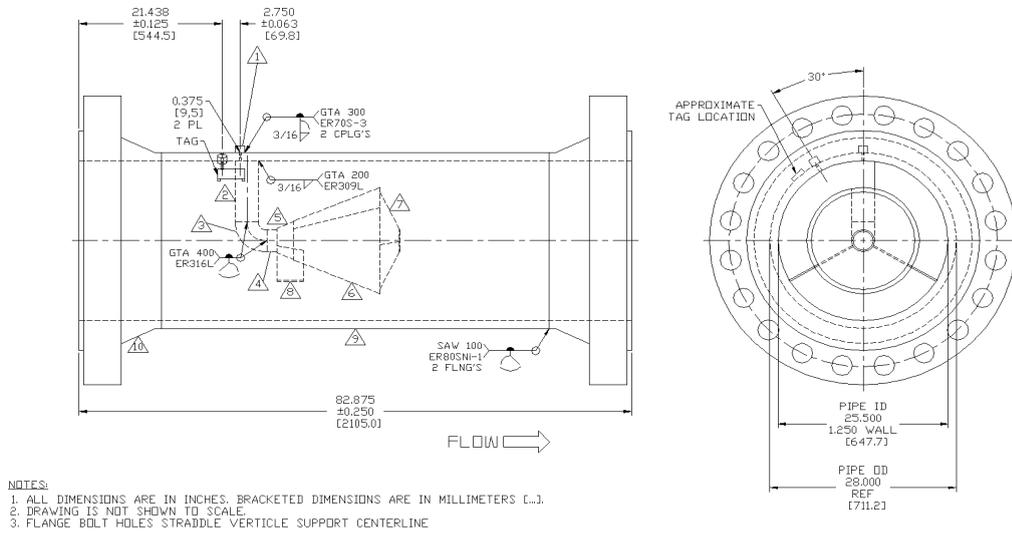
Drawing of the 28" (711mm) V-Cone Meter
